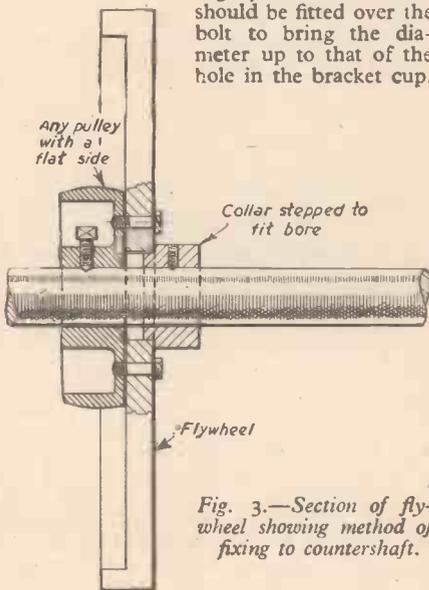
Section of flywheel showing method of fixing to countershaft.
